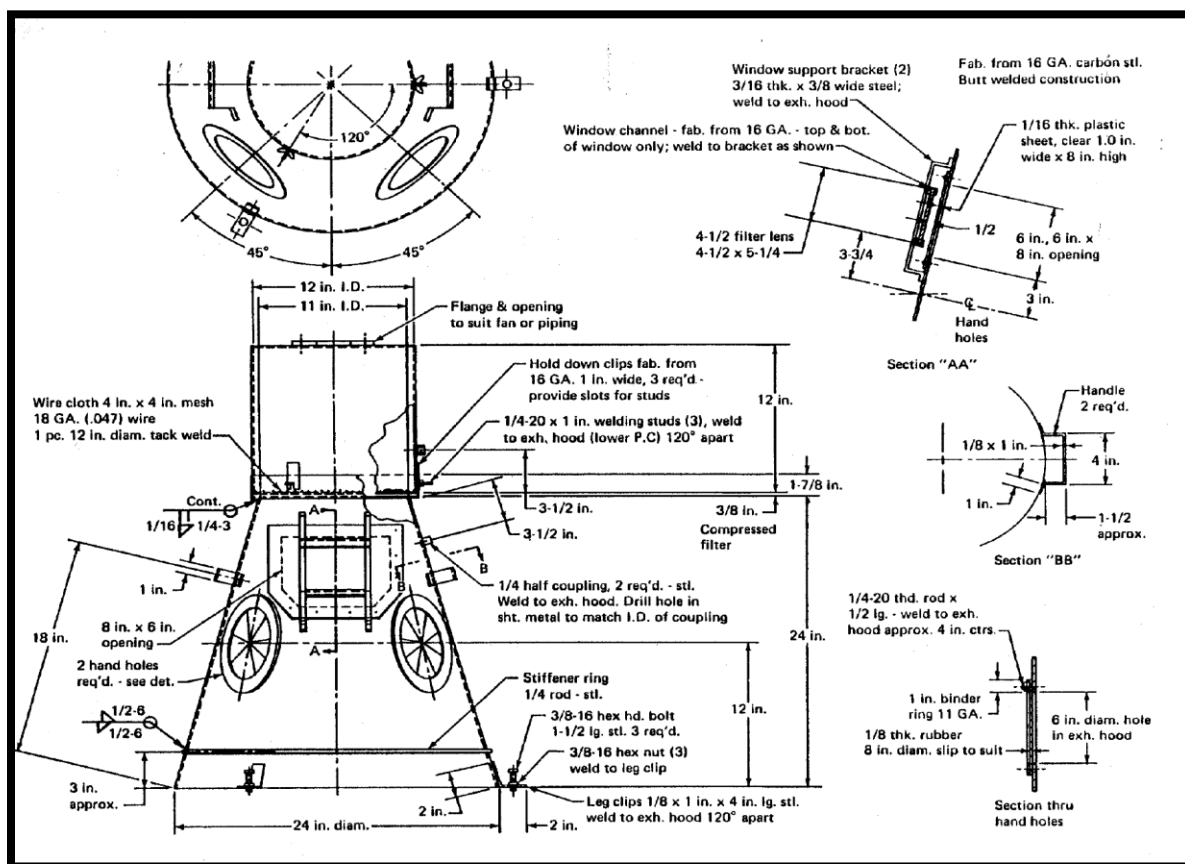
Weld Chamber Schematic -EPA AP-42 (Henning)
